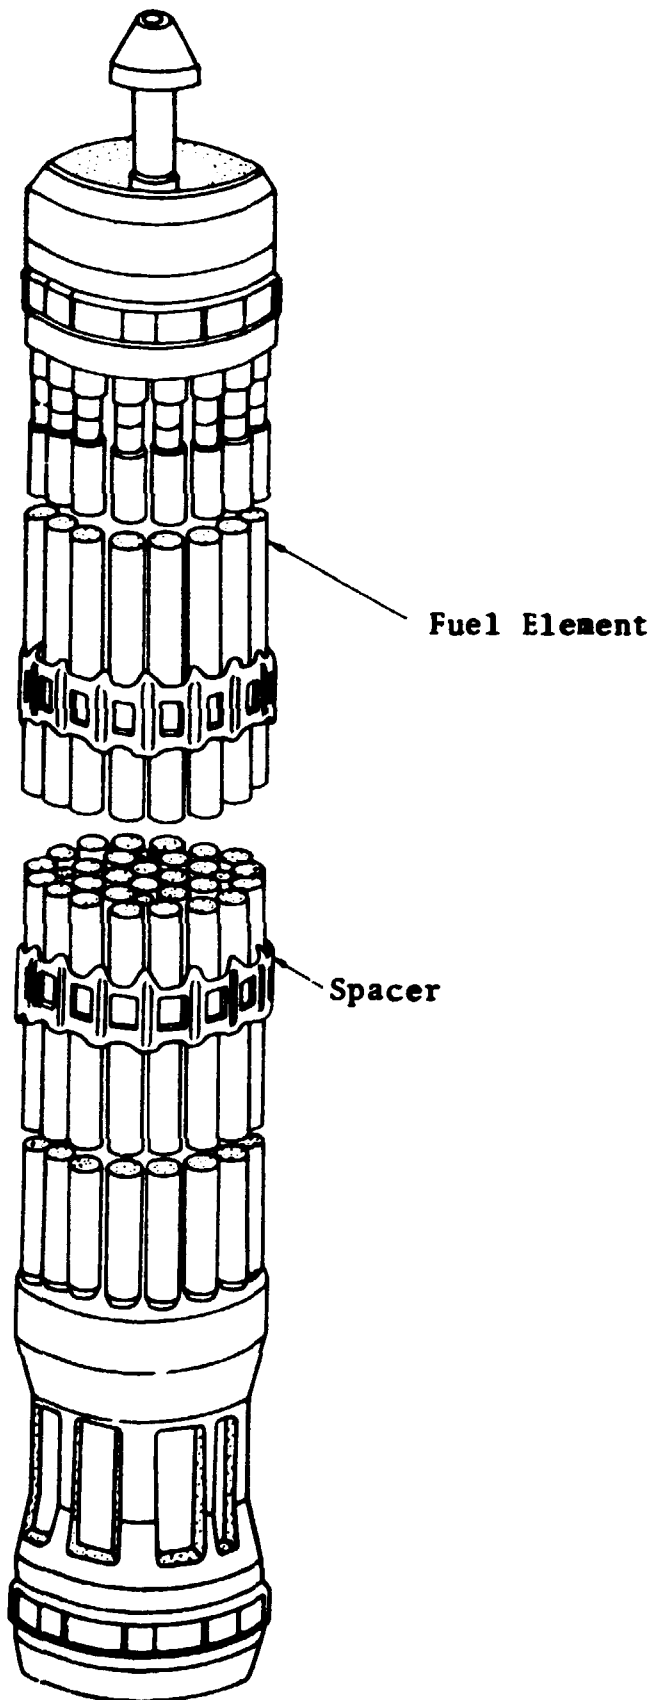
Outlook of Prototype Fugen Fuel Assembly
